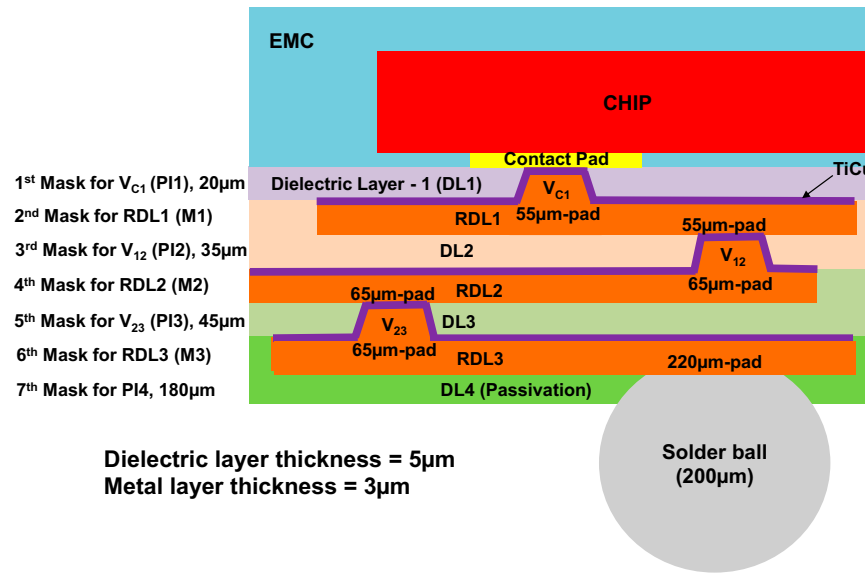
Schematic of the cross-sectional view of the test package. (UBM-less/Cu-pad for solder ball).
